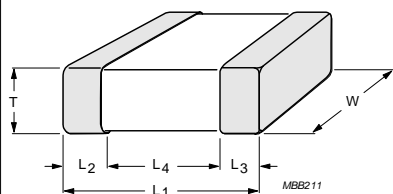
Surface mounted multilayer ceramic capacitor dimension
